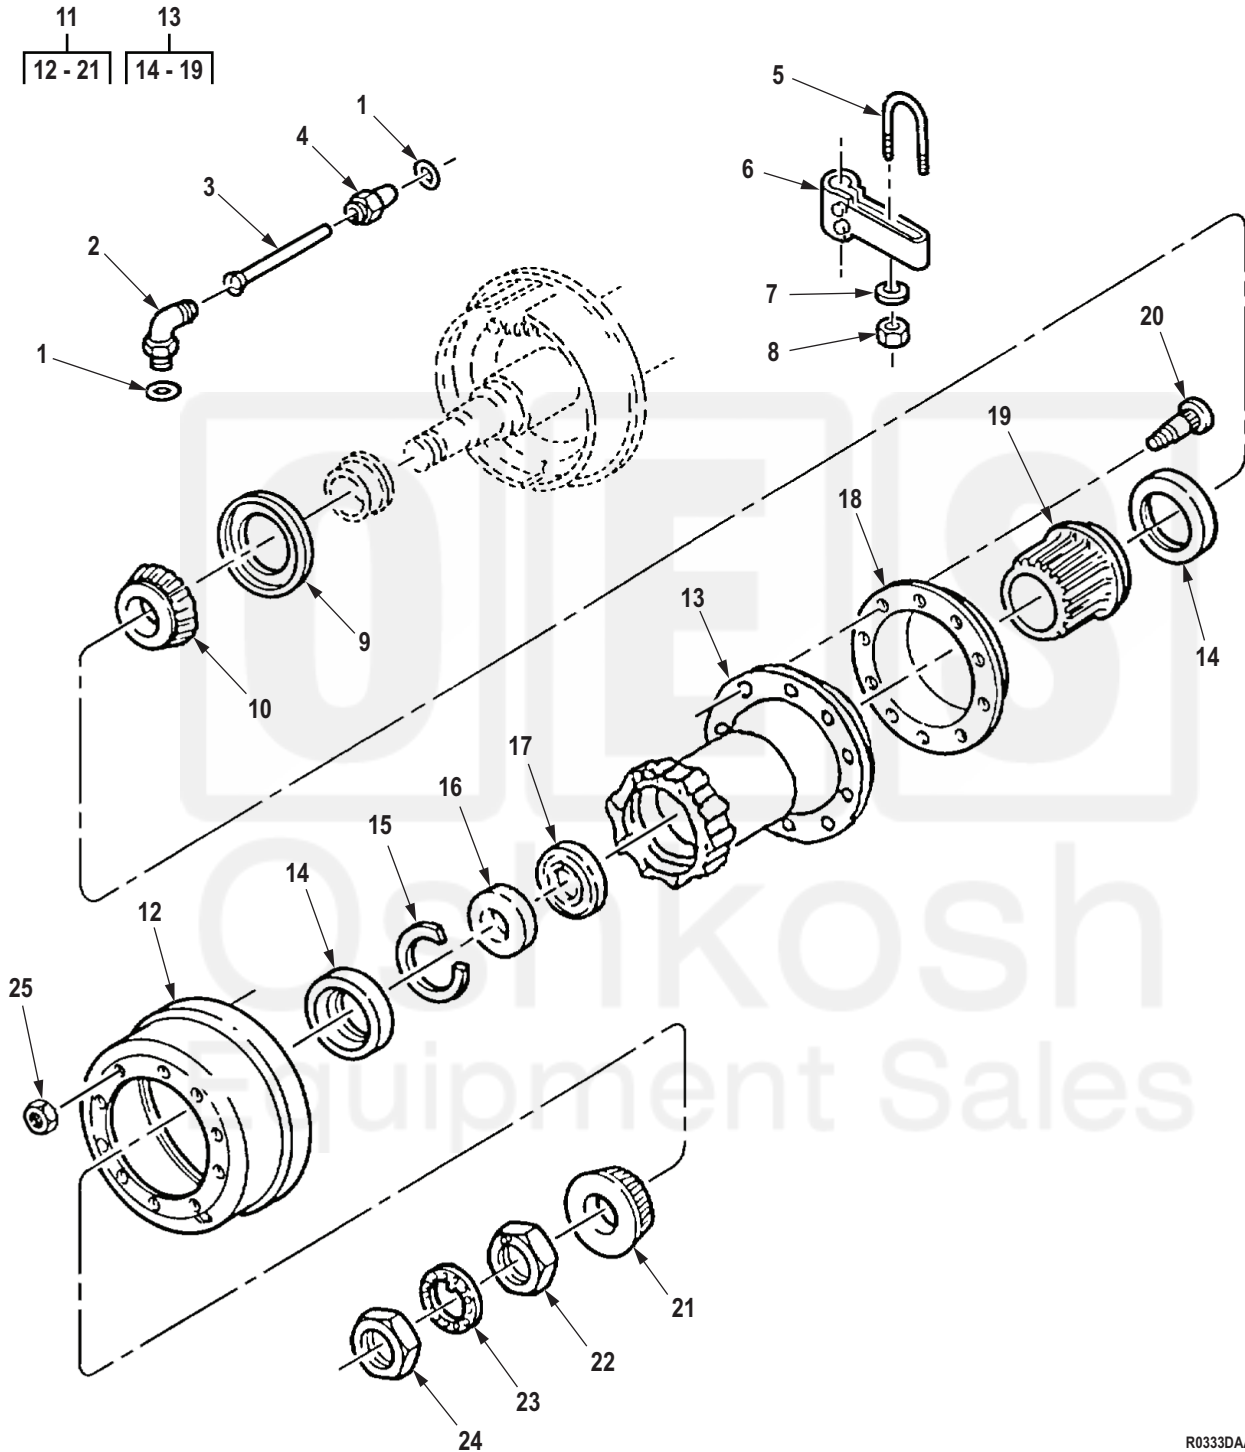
Rear Wheel Hub and Drum Assembly (M939A2)
